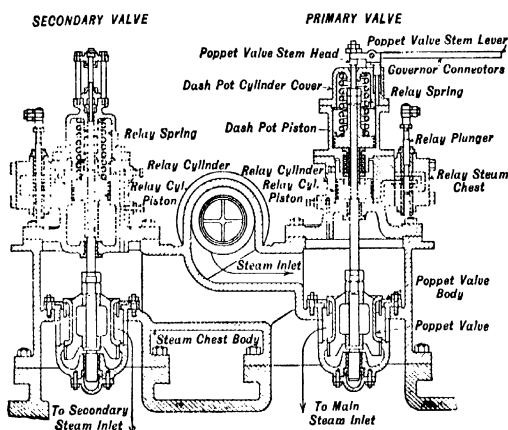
Steam-operated Relay Valve Westinghouse Turbine.
